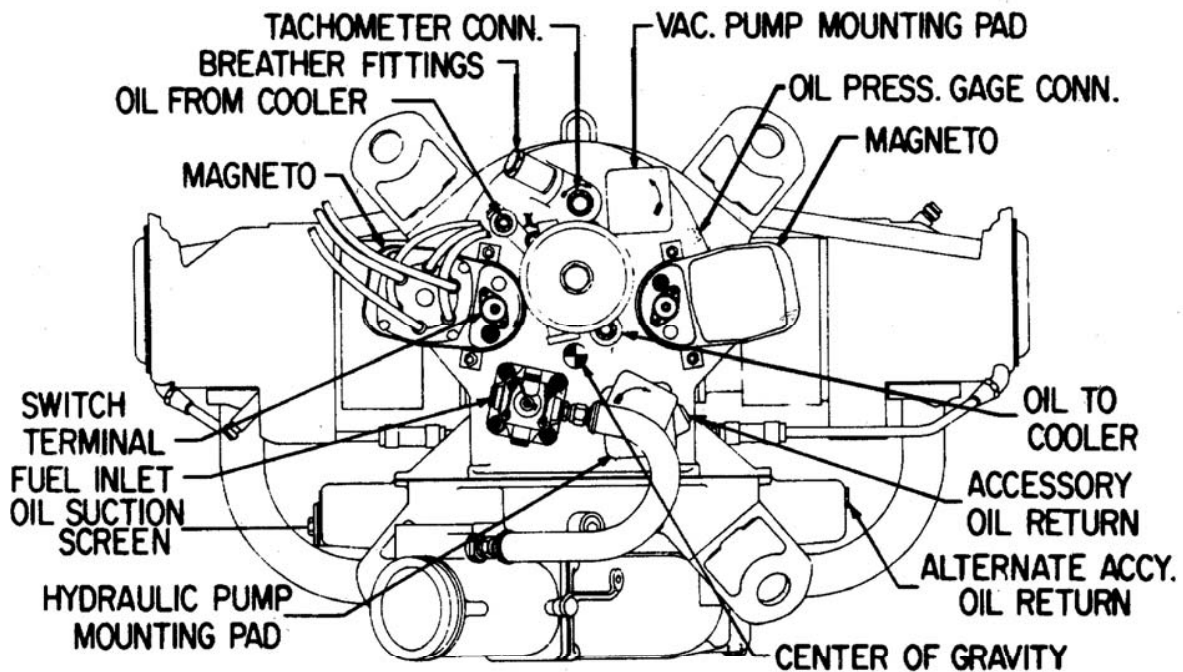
Installation Drawing - Rear View - IO-540-K
